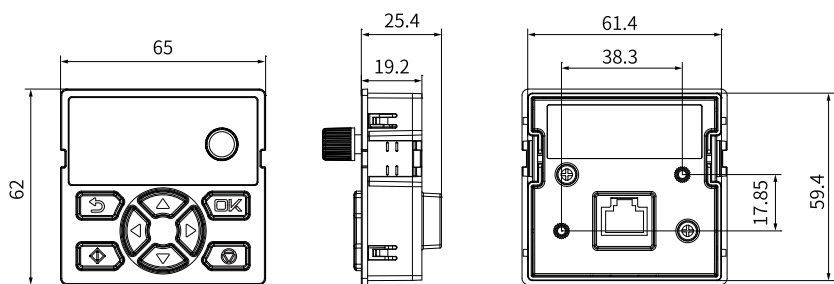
Dimensions (unit: mm) of the MD-BP-M
